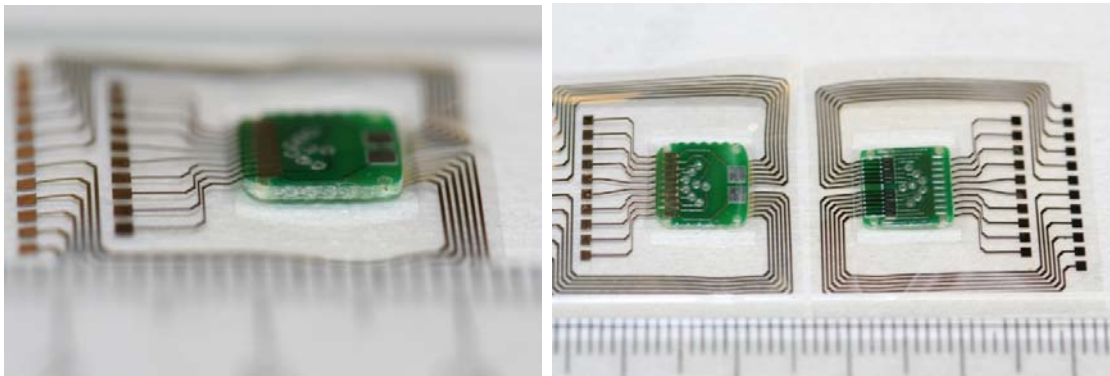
(left) Close-up view of the PCB inserted into the pocket. One can clearly see the traces on the right-hand side run underneath the PCB whereas the traces on the left hand side run above the PCB; (right) a side-to-side comparison of the front and back of the device.
